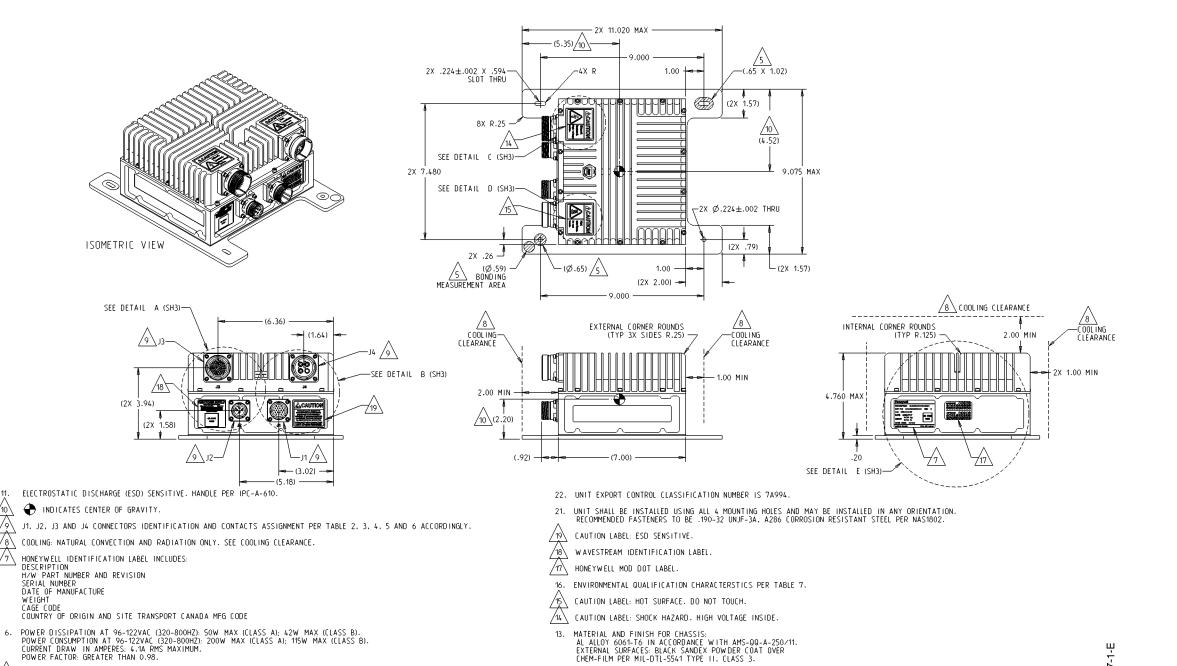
(Sheet 1 of 3) KANDU Outline and Installation Drawing (90401657, REV E)
